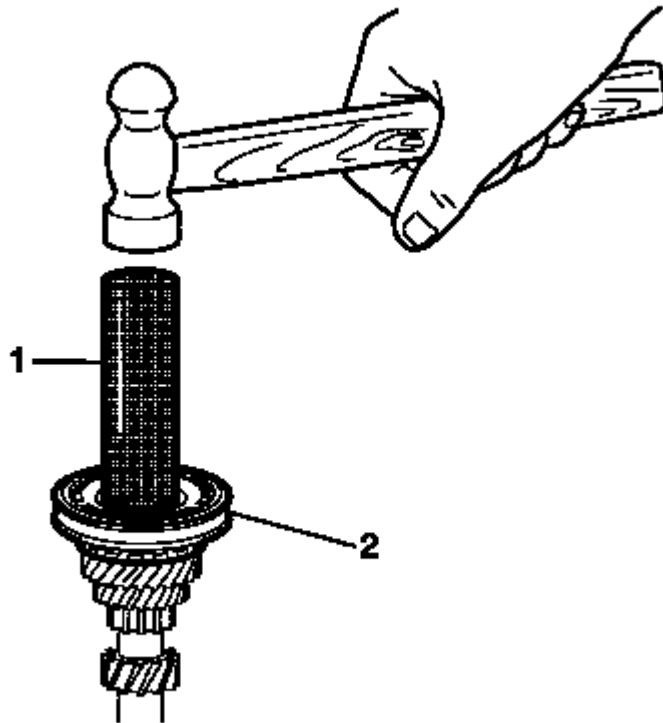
View Of DT-46496 Gear, Bearing Installer And A Hammer
